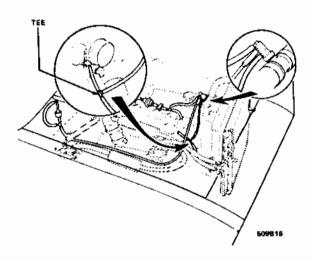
B-13 Thermo-vacuum Sensing Switch to Ported Vacuum
